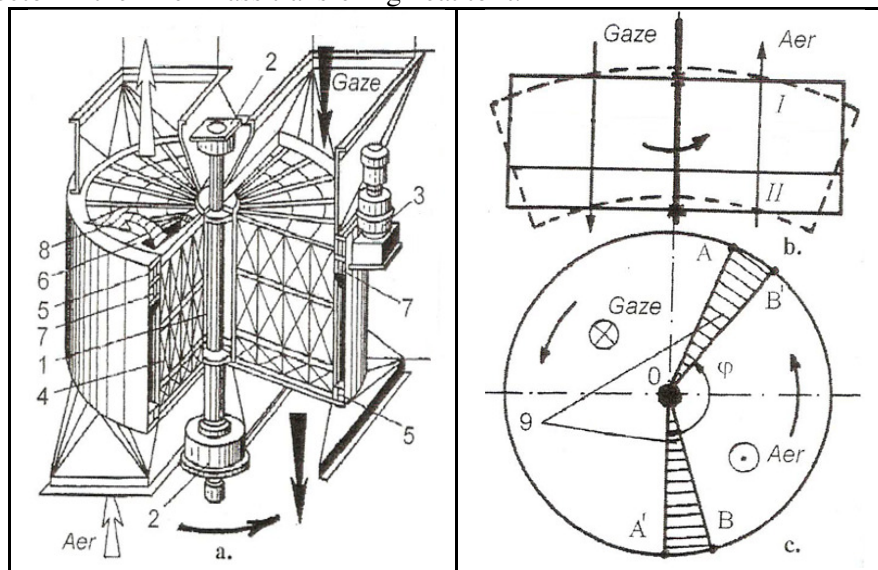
Sketches of the R.A.P.H. with mobile rotor (Ljungstrom): a- through the pre-heater view and section, b. bending of the vertical axis rotor and descendant gas flow; c- horizontal section through the rotor: 1- rotor axis; 2- support shaft; 3- training electric engine; 4- metal filler (inert mass); 5-external carcass; 6,7 - radial and peripheral sealing; 8- air infiltration by sealing; 9- sealing sectors
